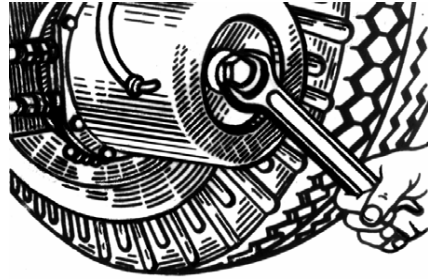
Unscrewing of the accumulator tappet stop bolt
